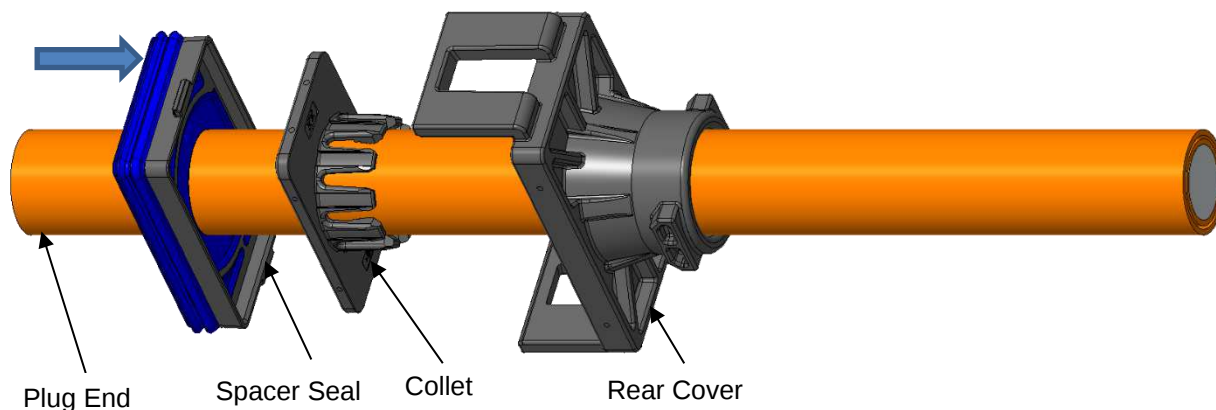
Rear cover, collet, and spacer seal loaded on cable
